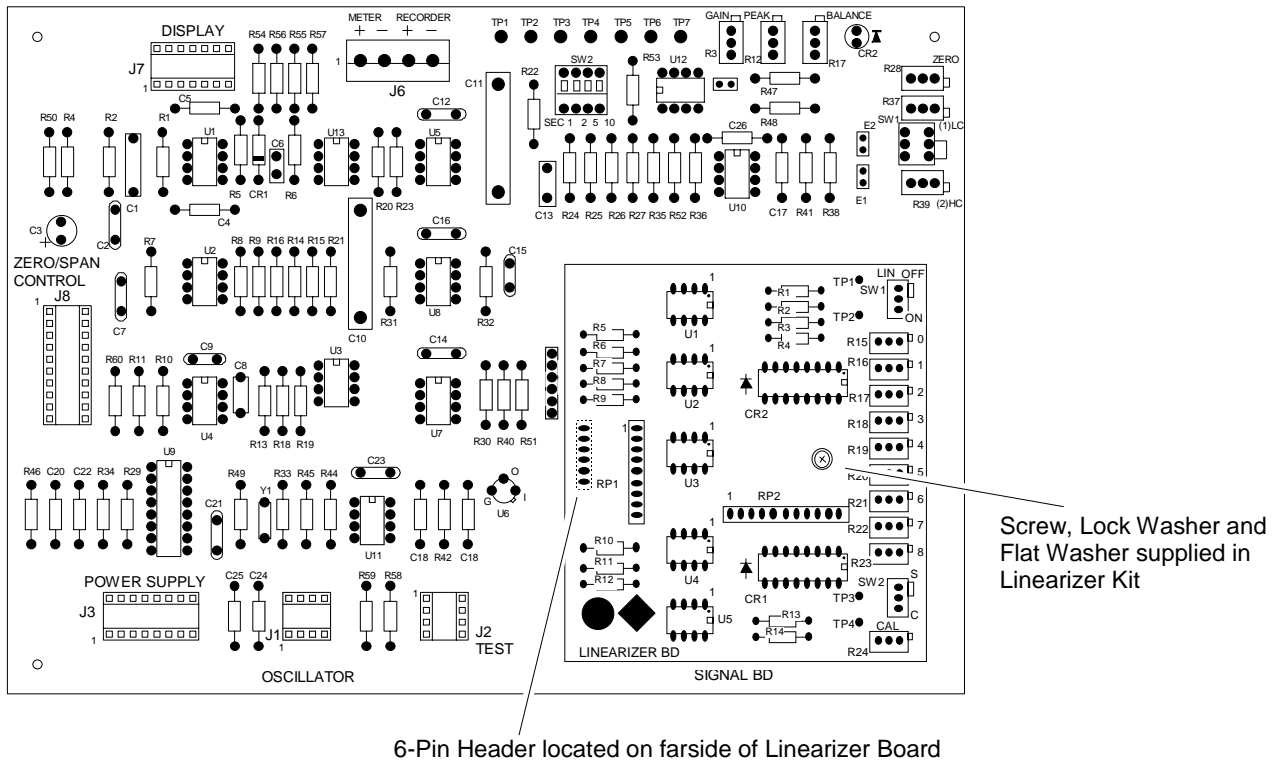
SIGNAL BOARD WITH LINEARIZER BOARD INSTALLED
